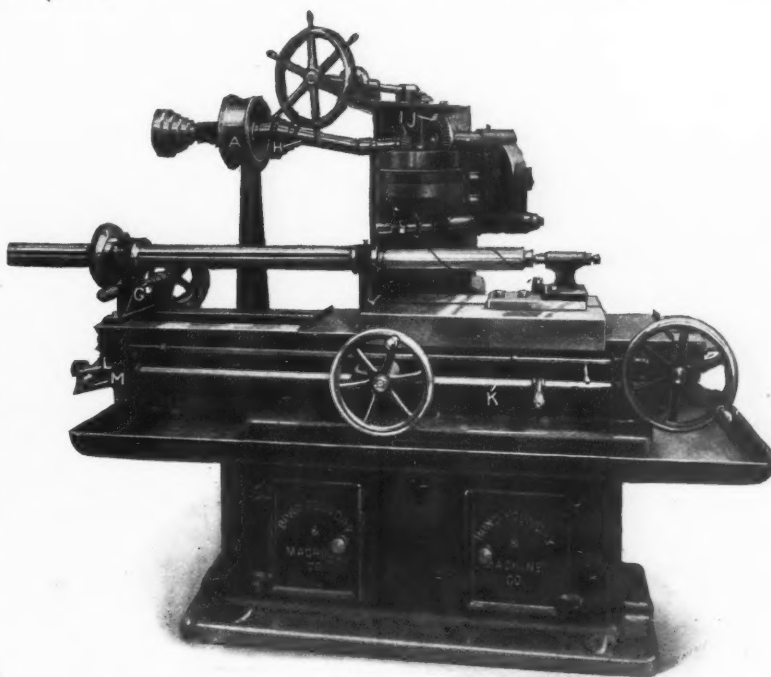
Bowen Milling Machine set up for milling a Helical Groove
